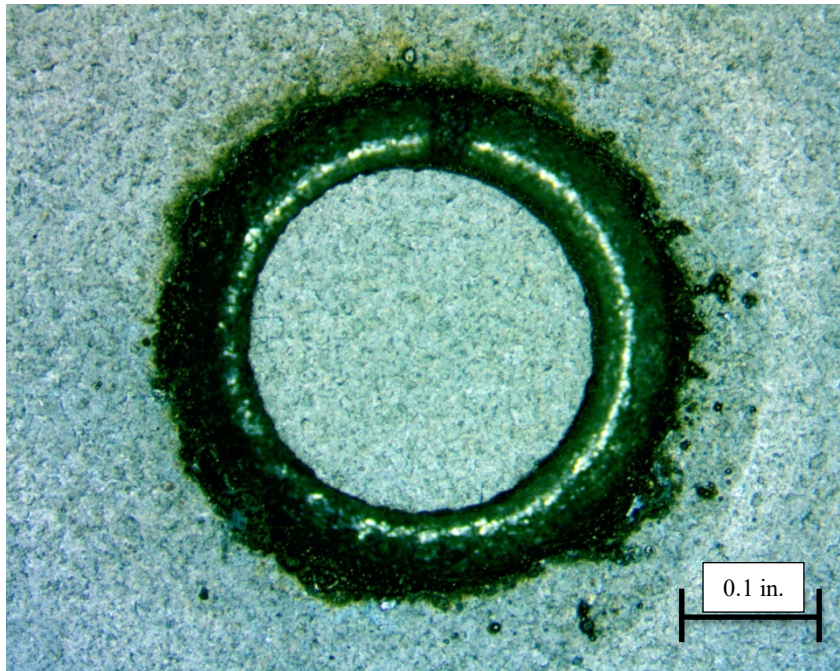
Task 1.1 Cut 2 with a Cut Depth of 0.05 in., an Electrode Diameter of 0.33 in., and a Fastener Material of Inconel
